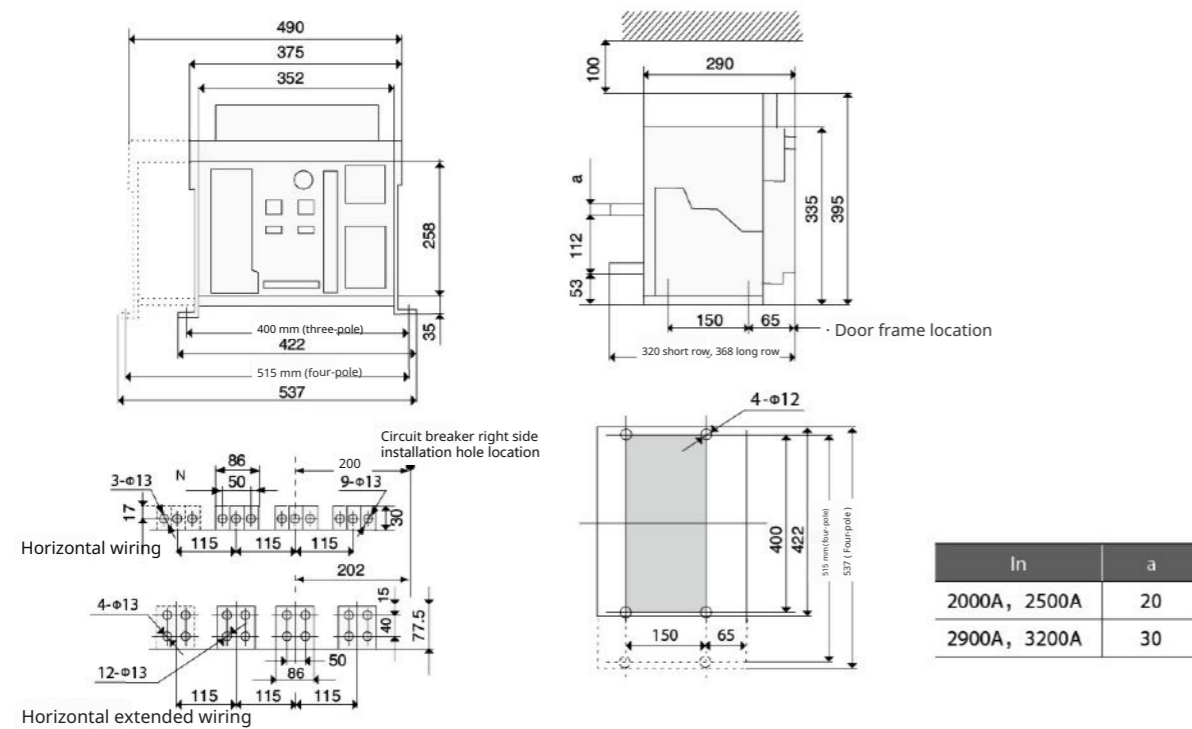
Fixed SDW1-3200 circuit breaker ( $I_n = 3200A$ , three-pole and four-pole) dimensional drawing
